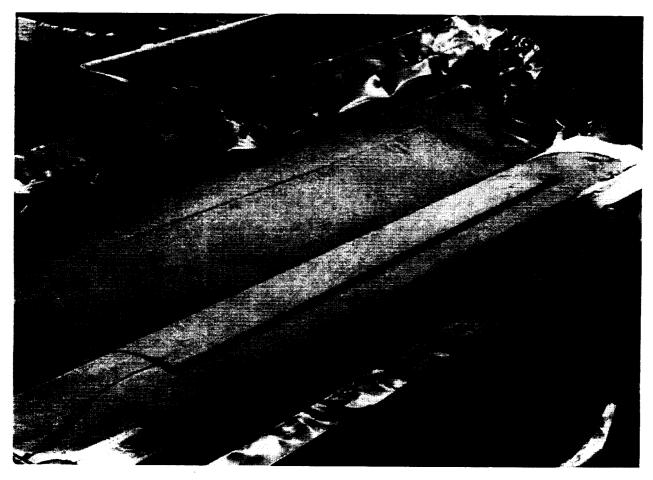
Preliminary Forming Tests Using Modified CH-47 Form
